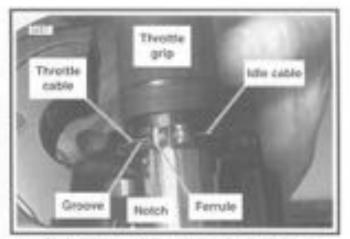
Install Throttle-lidle Control Cables on Throttle Control Grip
